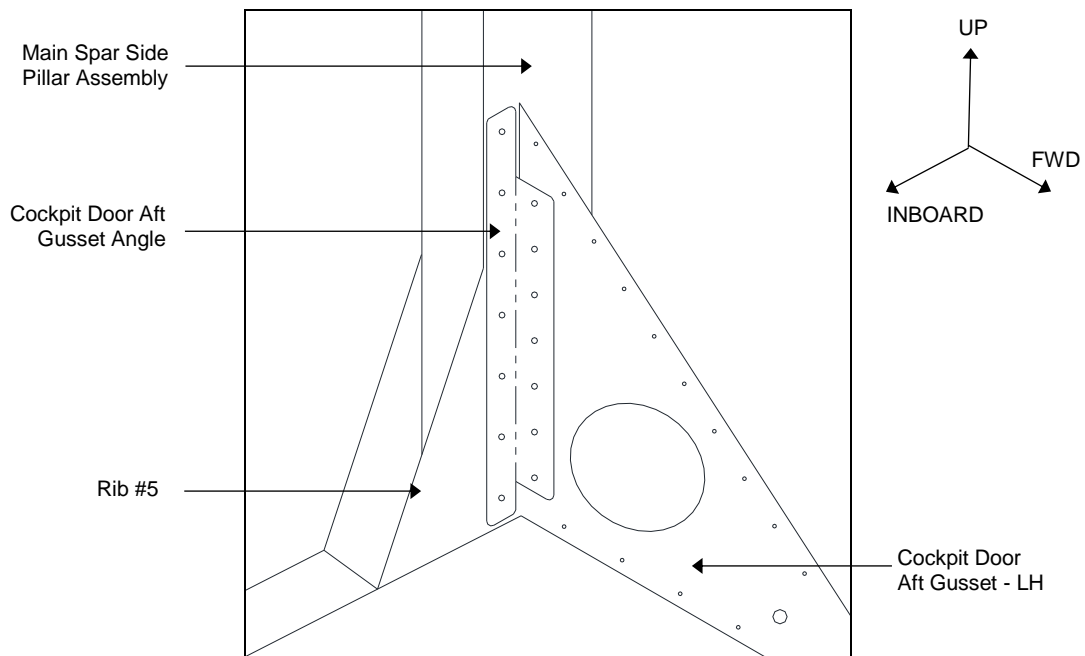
Cockpit Door Aft Gusset Angle attachment (LH shown, RH similar)
